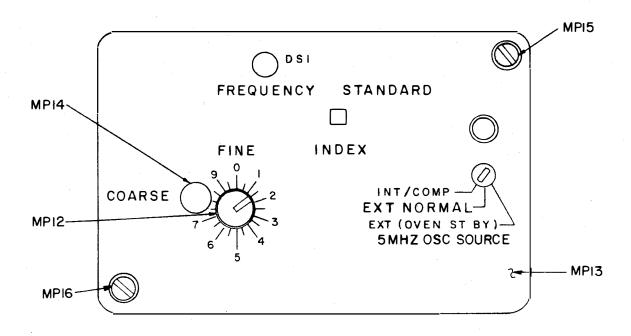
Frequency Standard Assembly A2A5, Component Locations
